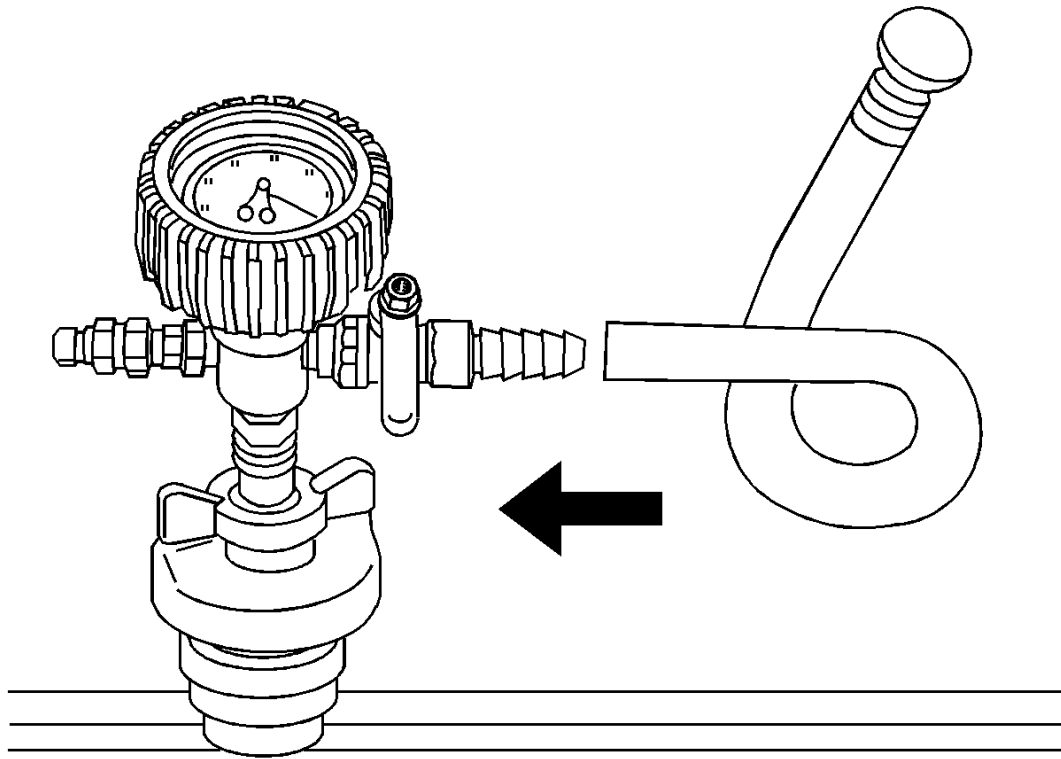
Attaching Fill Hose To Barb Fitting On Vacuum Gage Assembly
